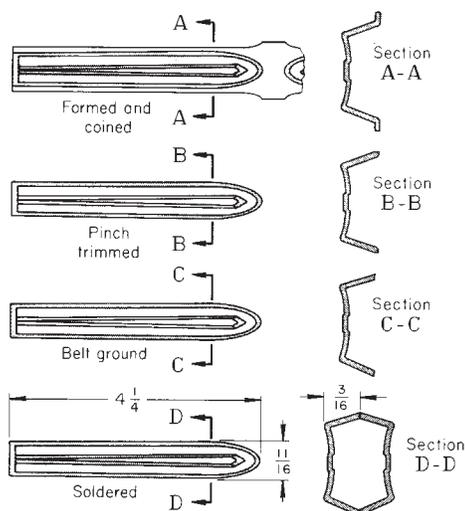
Production of a hollow copper alloy C75700 knife handle by forming and coining. Dimensions given in inches
